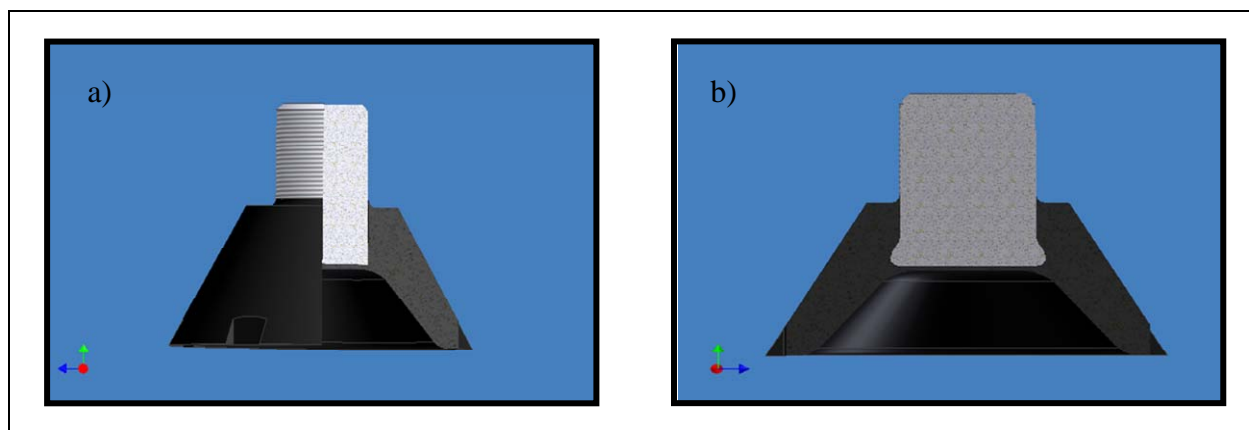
Cross section of LFT composite tailcone showing detail on inserts used during molding trials of hollow-back thermoplastic composite tailcones: (a) threaded insert and (b) beaded insert.
